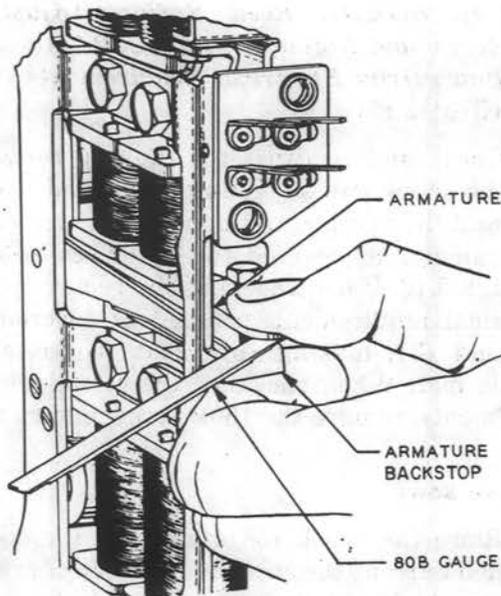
Method of Holding Gauge to Check Pawl Engagement
